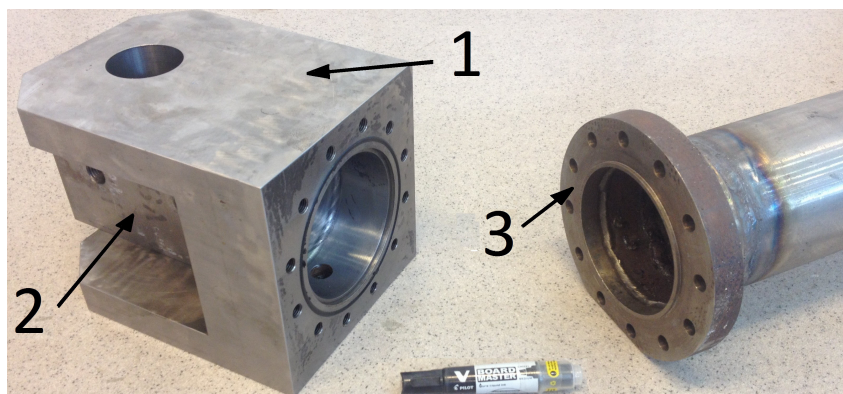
Parts of the connection between the pipe and the horizontal actuator. Fork (1), block bearing (2) and flange (3) [6].
